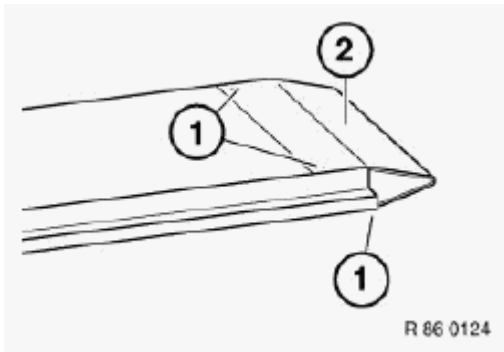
Identifying Entry Profile Section On Loading Ramp
